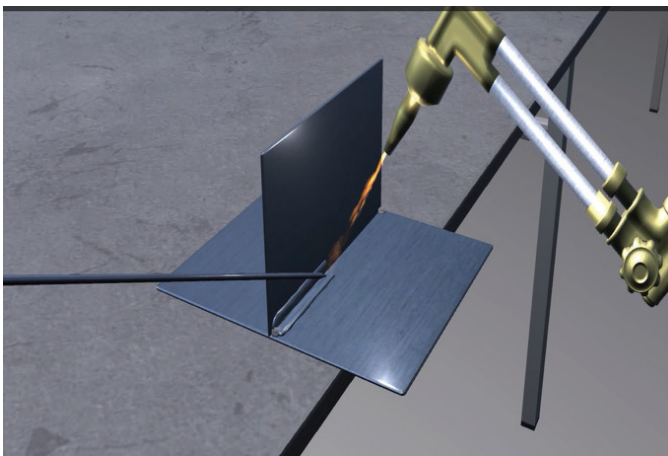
Illustration of welding process and welding results. Source: Compiled by the authors.
